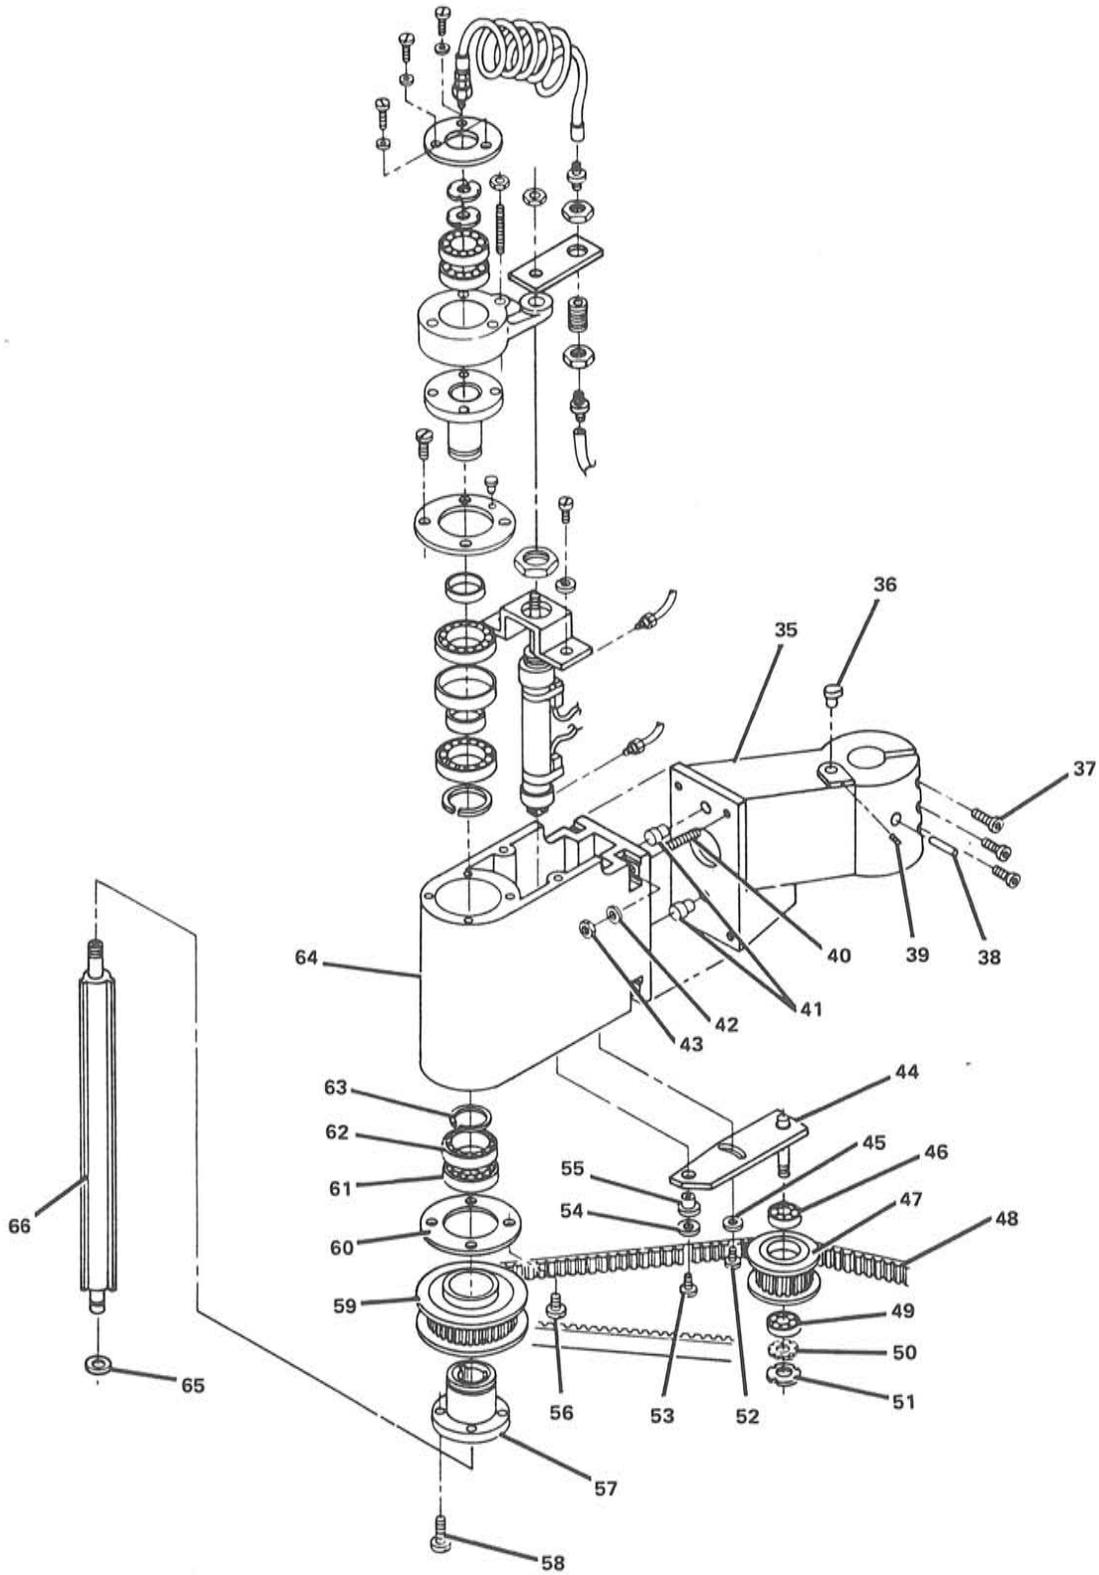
Z-AXIS ASSEMBLY. SHEET 2 OF 2. INDEX NOS. 35-66. SEE LIST 1.
